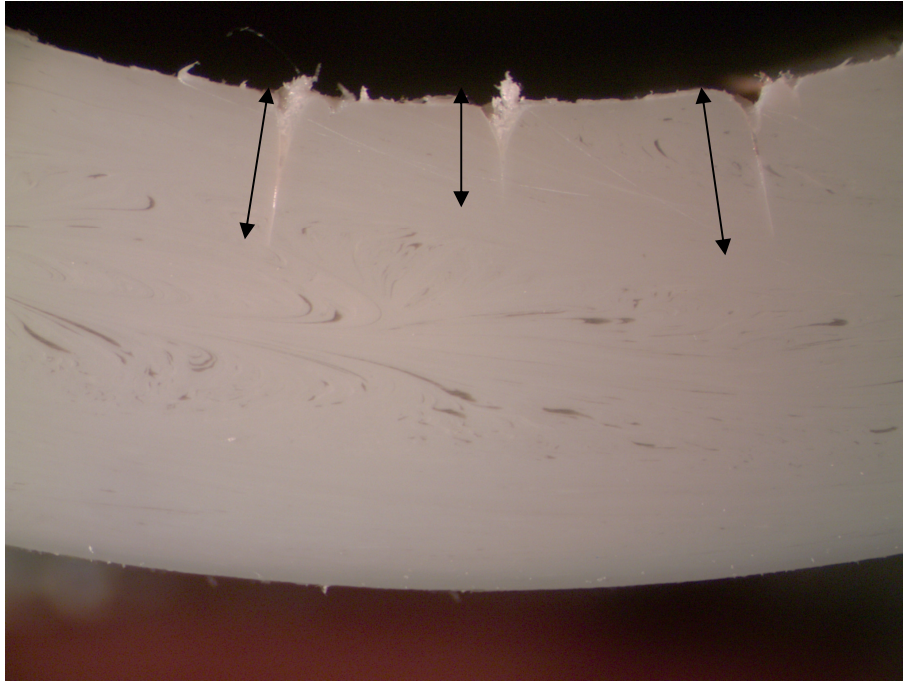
Cross section of the pipe wall. The arrows are indicating the penetration depth of the cracks.
